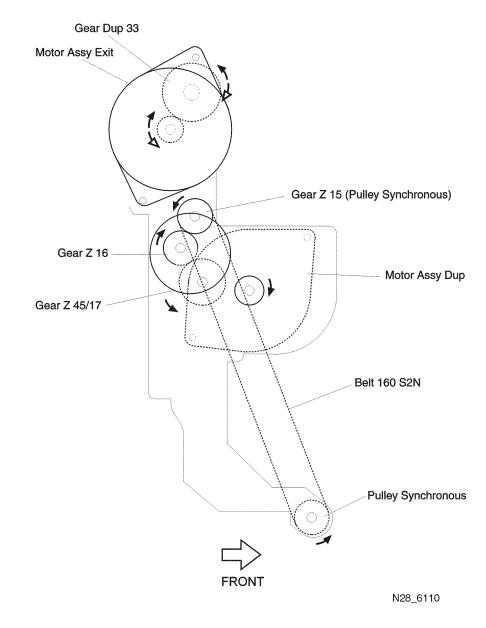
Drive Power Transmission through Duplex Assembly Gears
